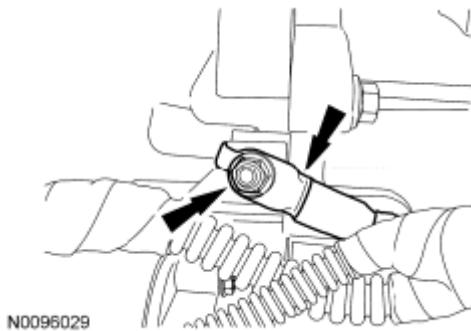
Locating Nut & Starter Motor Stud Bolt
